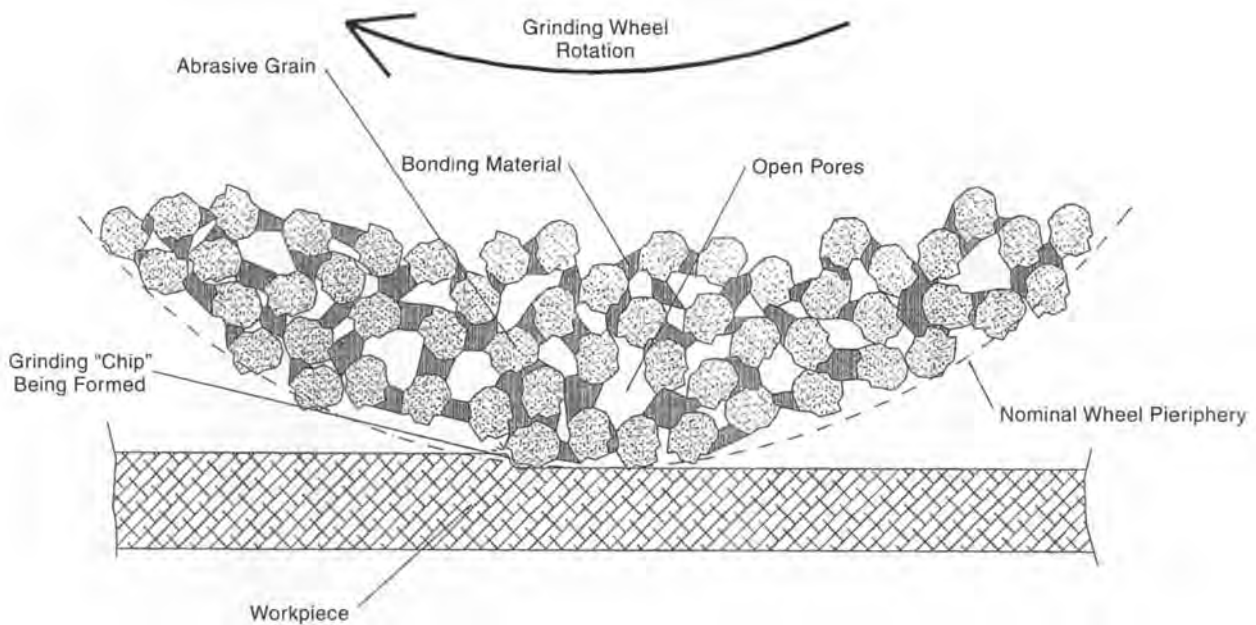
C The grinding process. Sharp edges of individual abrasive grains act as minute cutting tools, removing small amounts of material from the workpiece. (Courtesy J. R. Casey Bralla)
